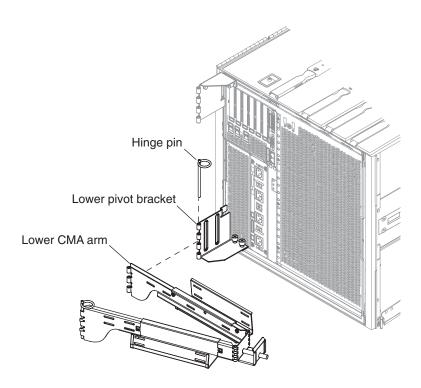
Attachment of Lower CMA Arm and Pivot Bracket
